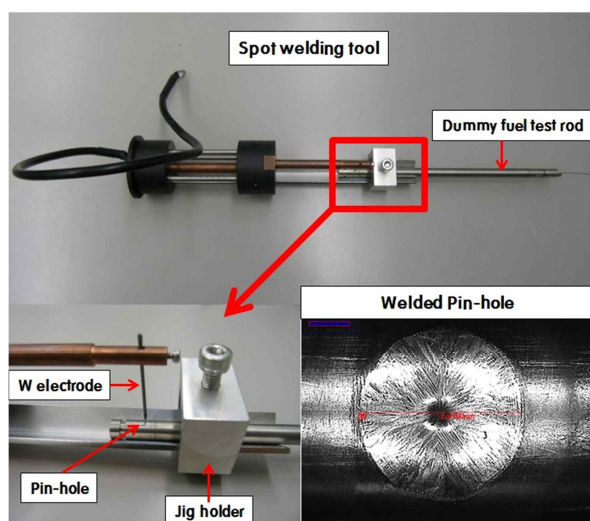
The spot welding tool mounted with a dummy fuel test rod and a pin-hole welded by spot welding
